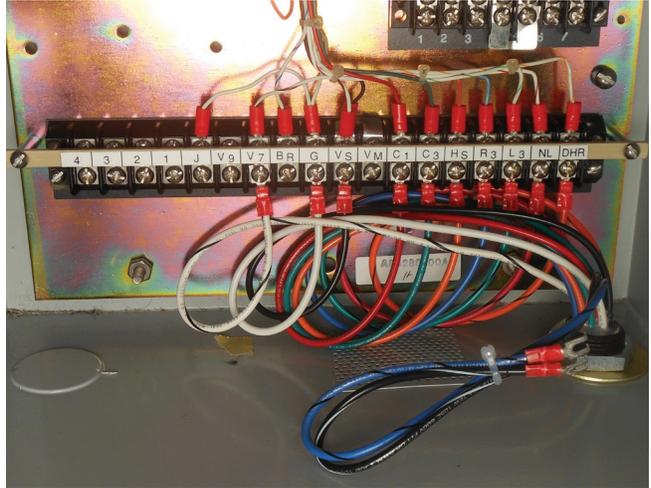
Pigtail wires connected to fanning-strip style terminal board.
